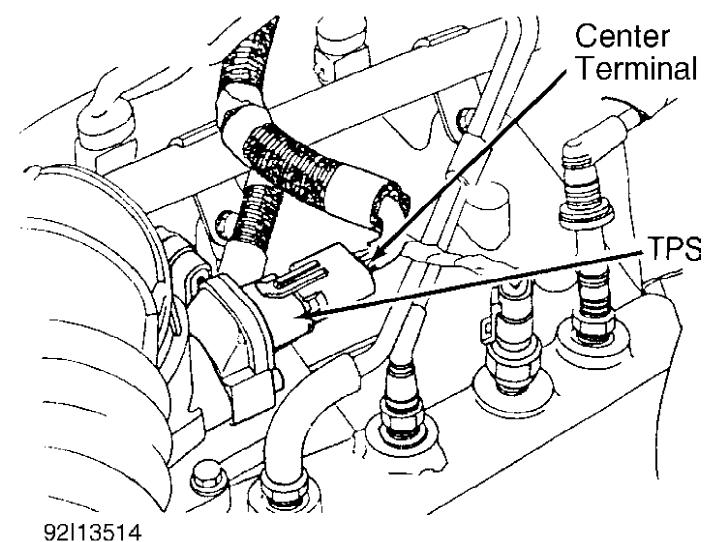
Identifying TPS Electrical Connector Courtesy of Chrysler Corp.
